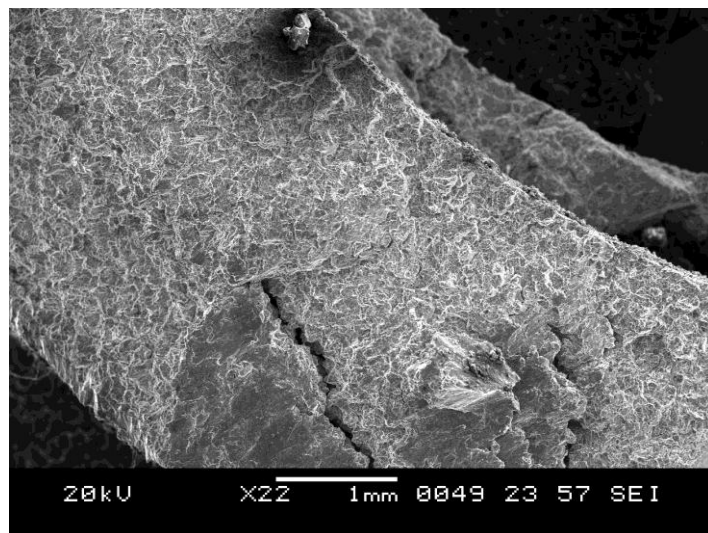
Fractograph showing crack growth along the wall thickness of CP-Al tube in the cast form
